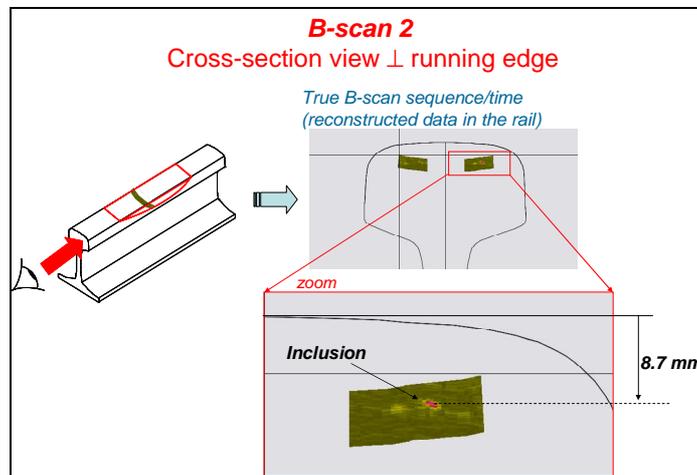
Example of inspection on track – Cross-section view \perp to the running edge (B-scan)
